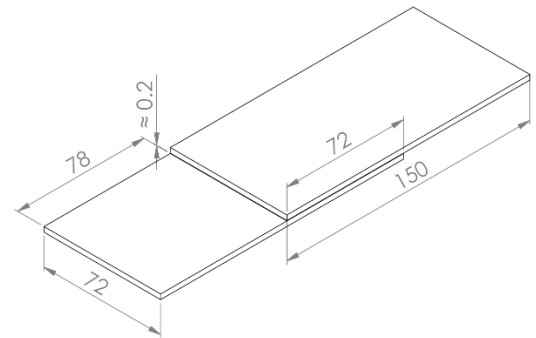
Large-scale specimens' geometry and main dimensions (isometric view)
